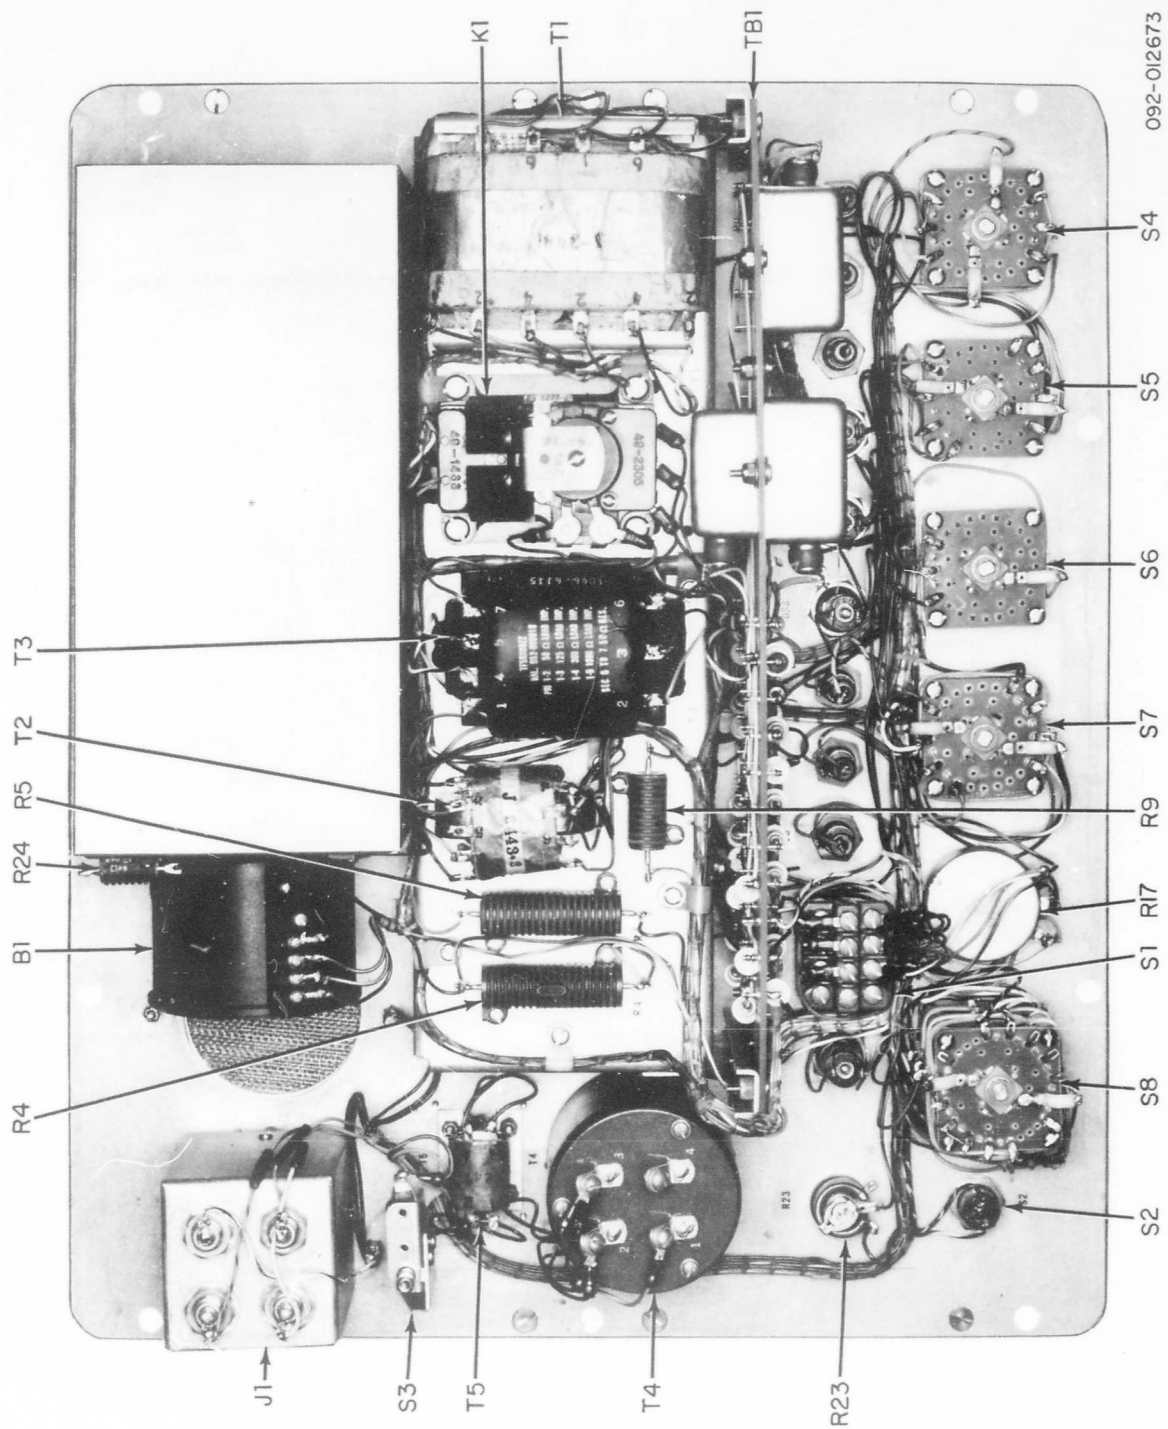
Test Set, Electron Tube QRC-133A(T), Front Panel, Rear View.
